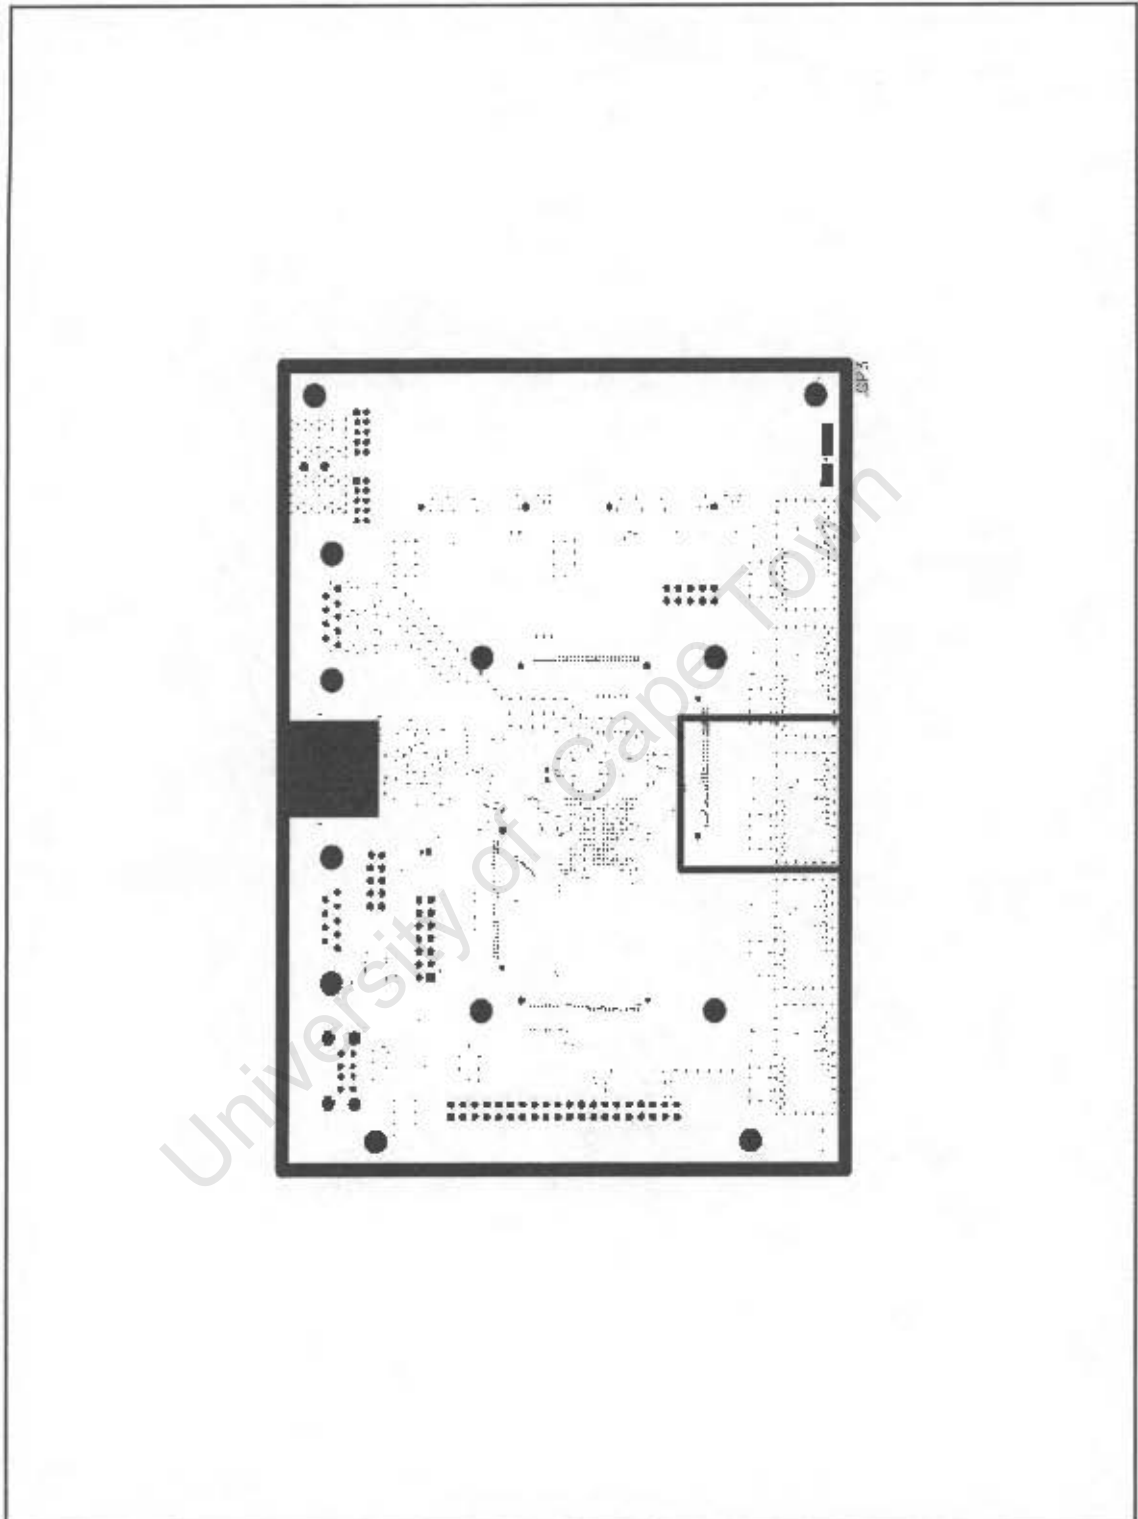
RUI Motherboard PCB Layout - +1.22V/+1.5V Supply Plane
